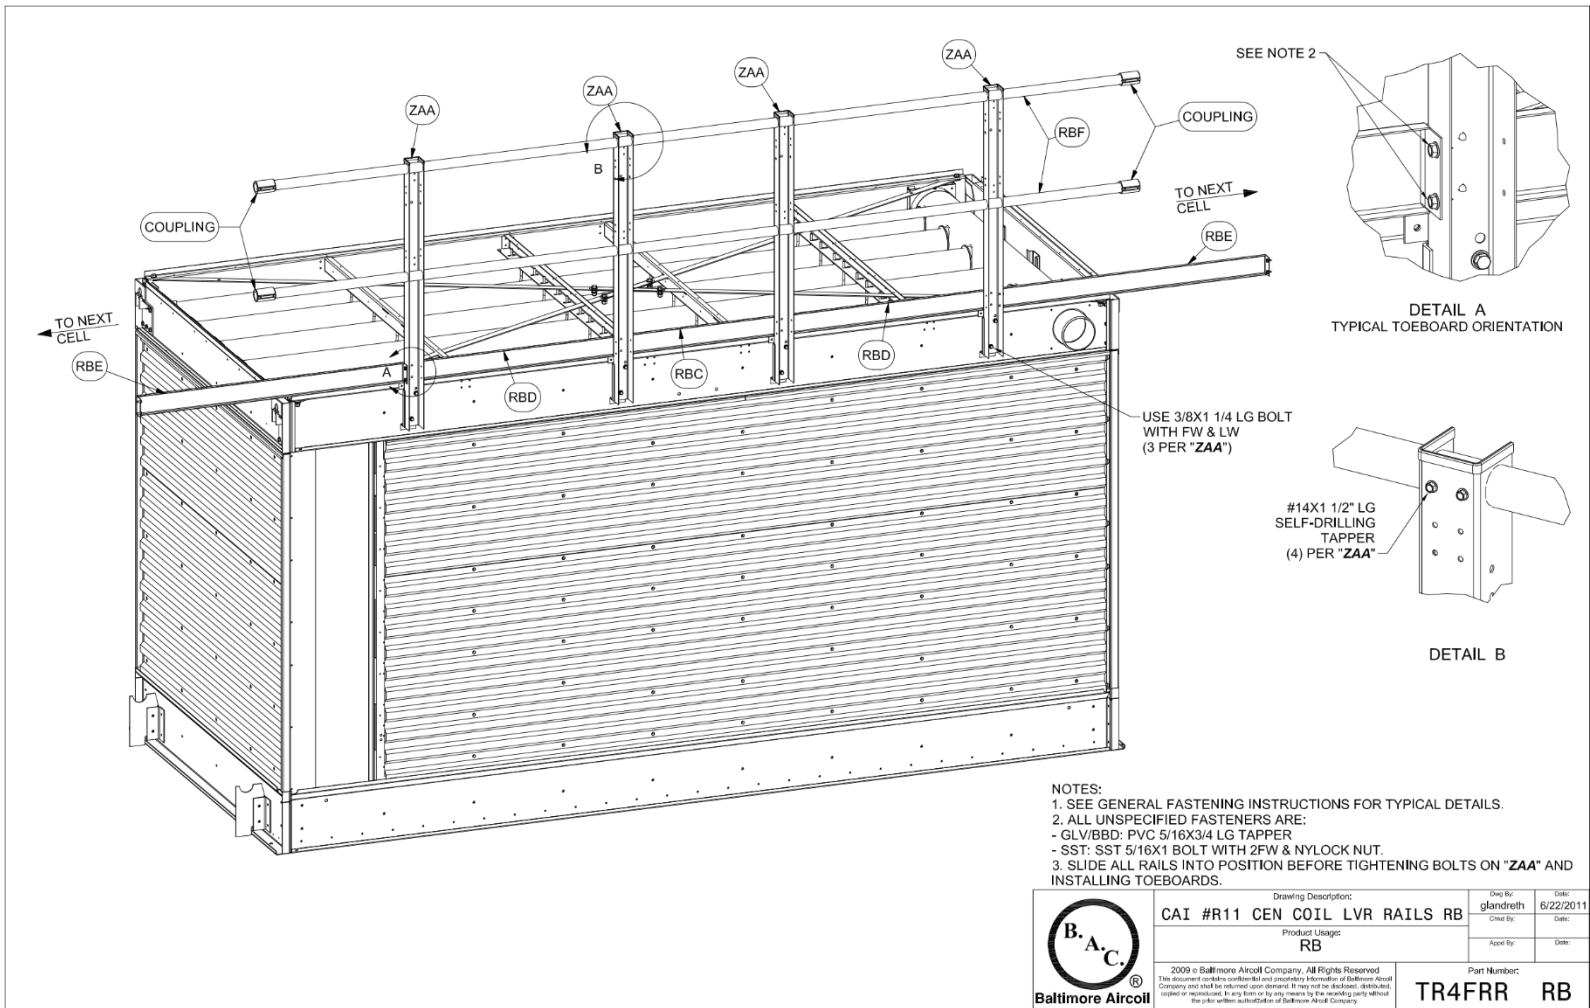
TR4FRR Louver Face Railing Installation on Multi-cell Center Unit, No Ladder Opening
